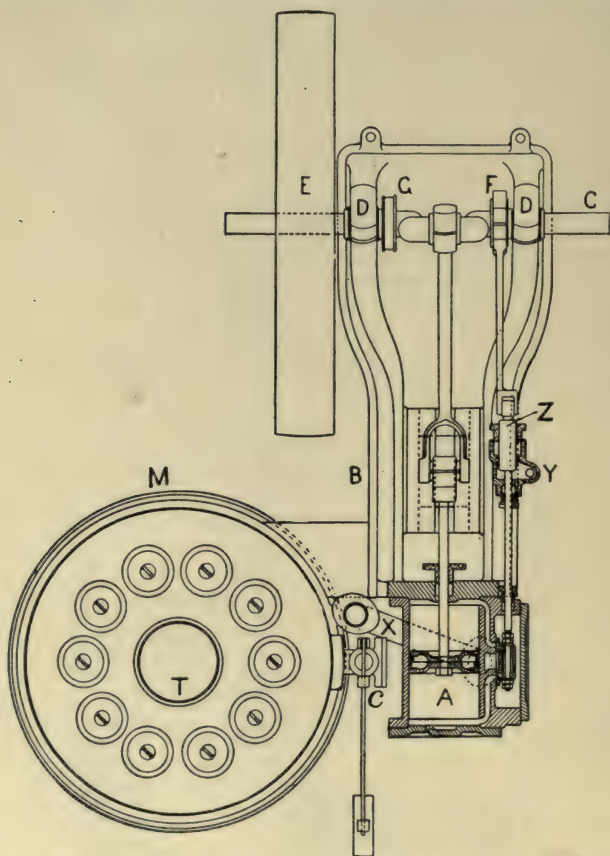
Plan of the steam plant shown in Fig. 288. The cylinder and feed pump are shown in section.
